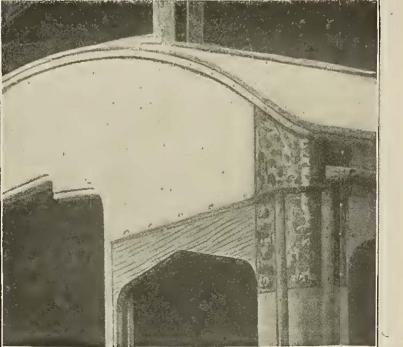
CORNER PLATES. (J. G. BRILL CO., 1895)
